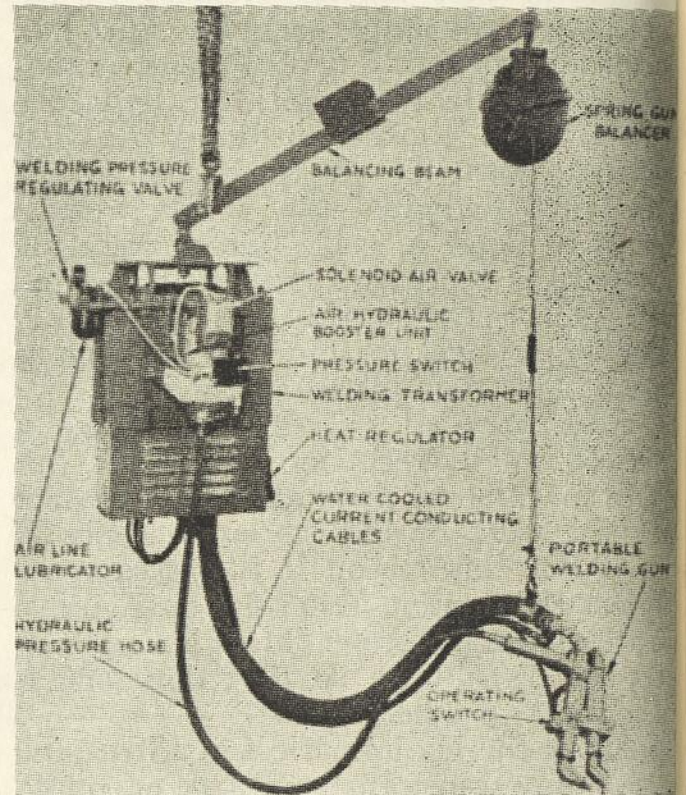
Work not readily mobile is welded with this type of portable welder. The weight of the equipment involved has been ingeniously counterbalanced to facilitate handling of gun.
